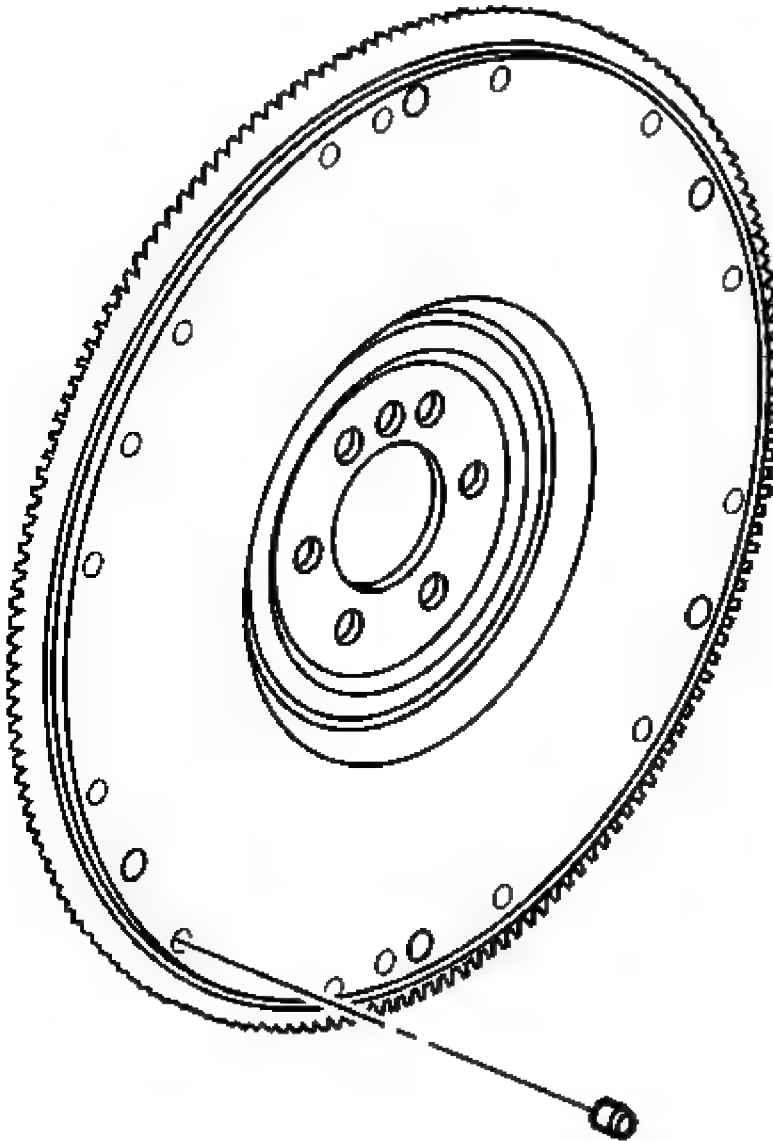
Locating Flywheel Weights (Manual Transmission)
